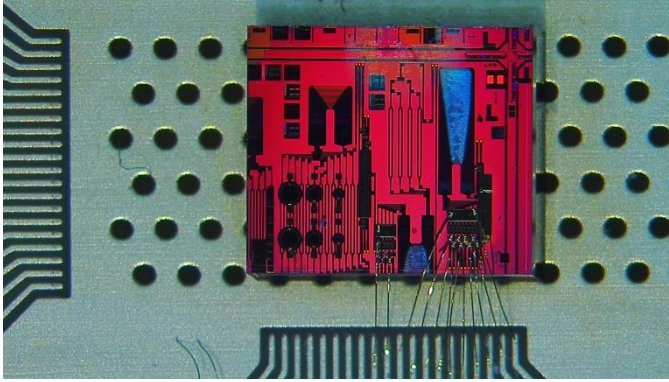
Half of the sample shown in Figure.2.29 is wire bonded to a PCB.
